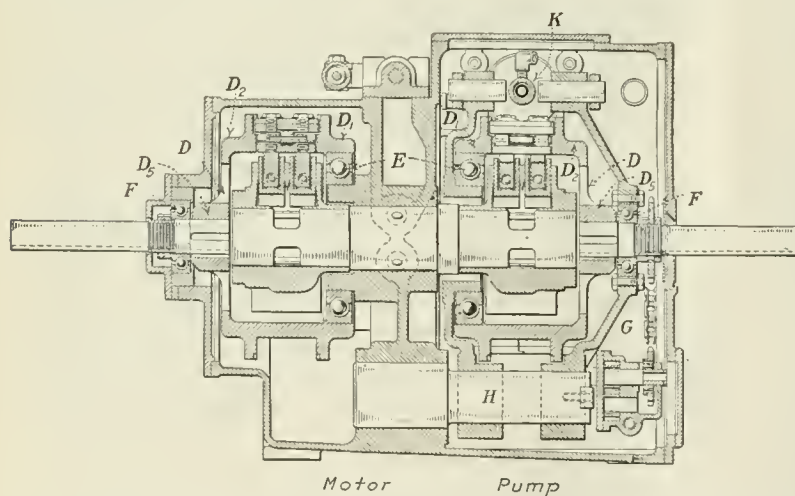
OILGEAR HYDRAULIC-TRANSMISSION VARIABLE-SPEED DRIVE, LONGITUDINAL SECTION
